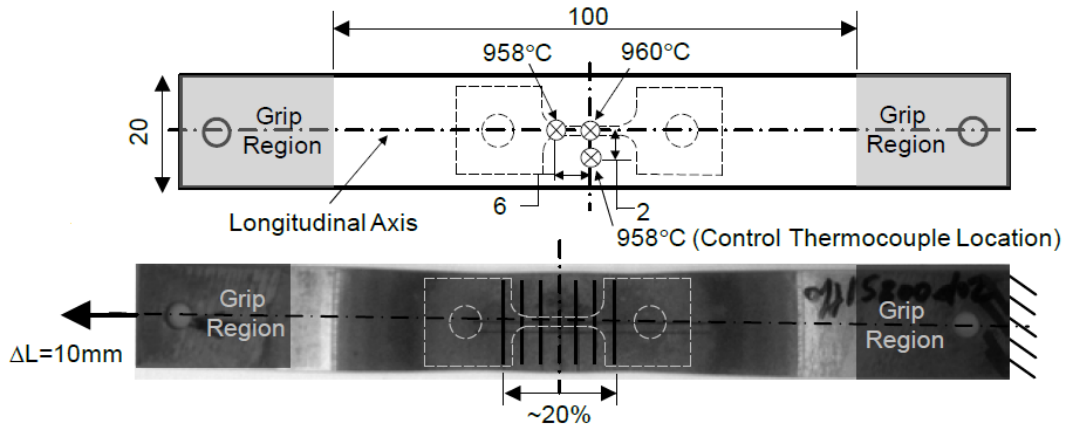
Blank used in Gleeble thermo-mechanical simulator, indicating thermocouple locations and region from which specimens were machined [36]
